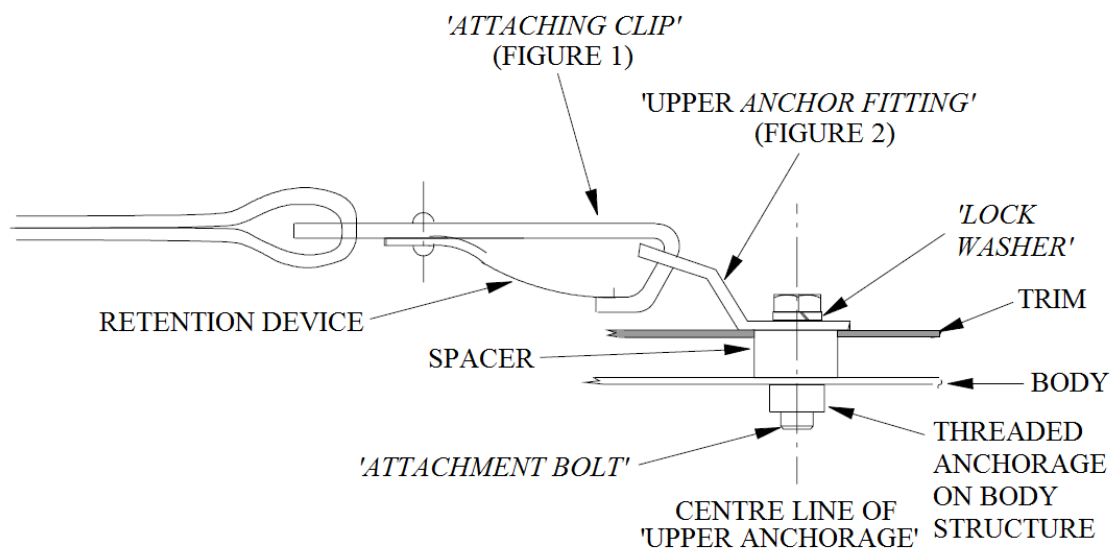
TYPICAL ANCHOR FITTING ‘INTERFACE PROFILES’
